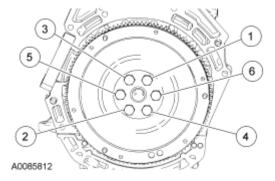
Identifying Flexplate Bolts Tightening Sequence Courtesy of FORD MOTOR CO.
